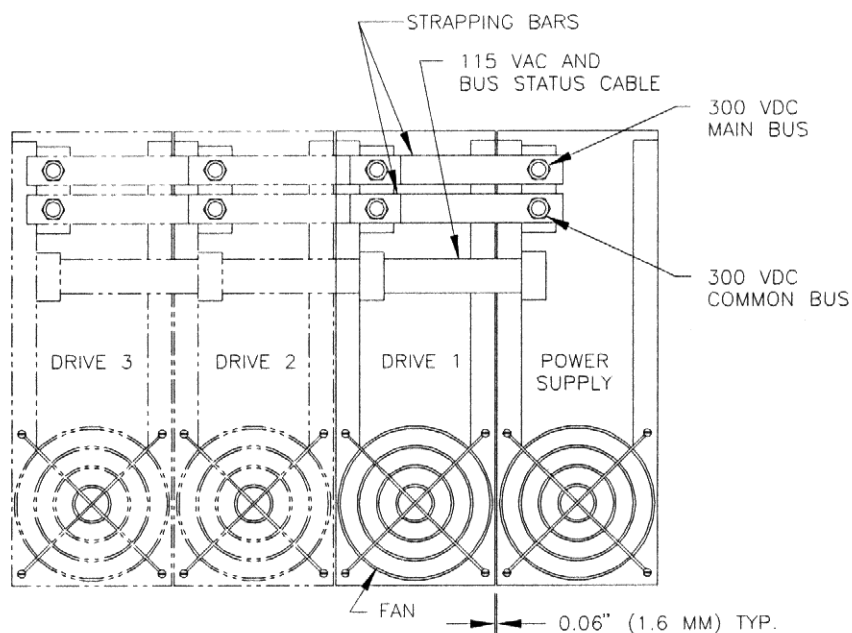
Power Supply and Drives: Relative Positions (Bottom View)
